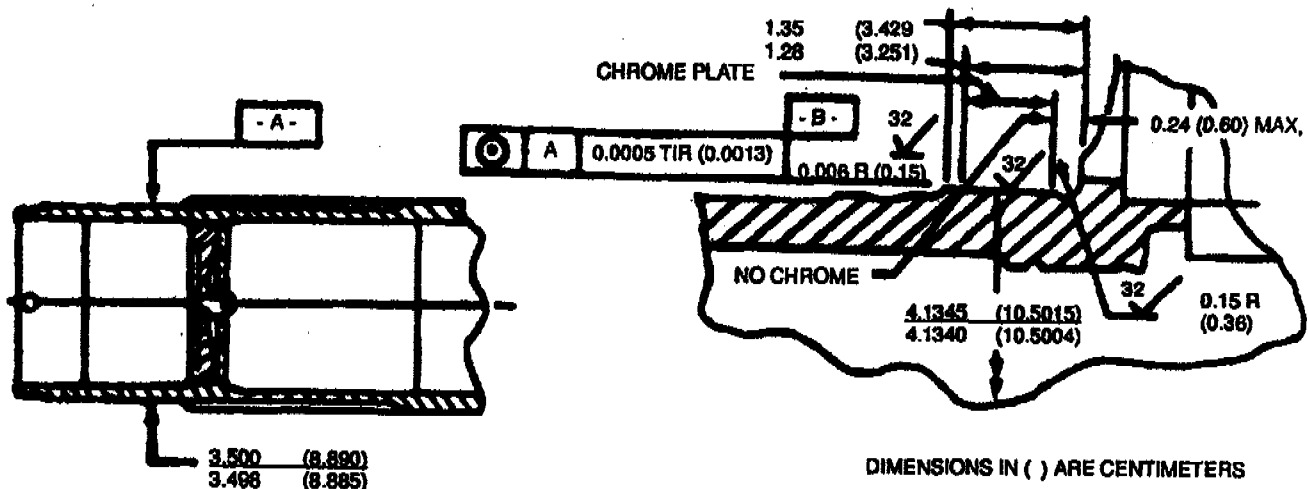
Propeller Shaft Rework - (P/N 1-020-290-01).
